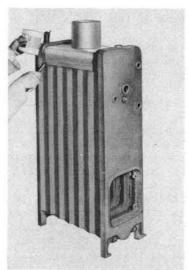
Cementing Flue Header Cover to Heat Exchanger
